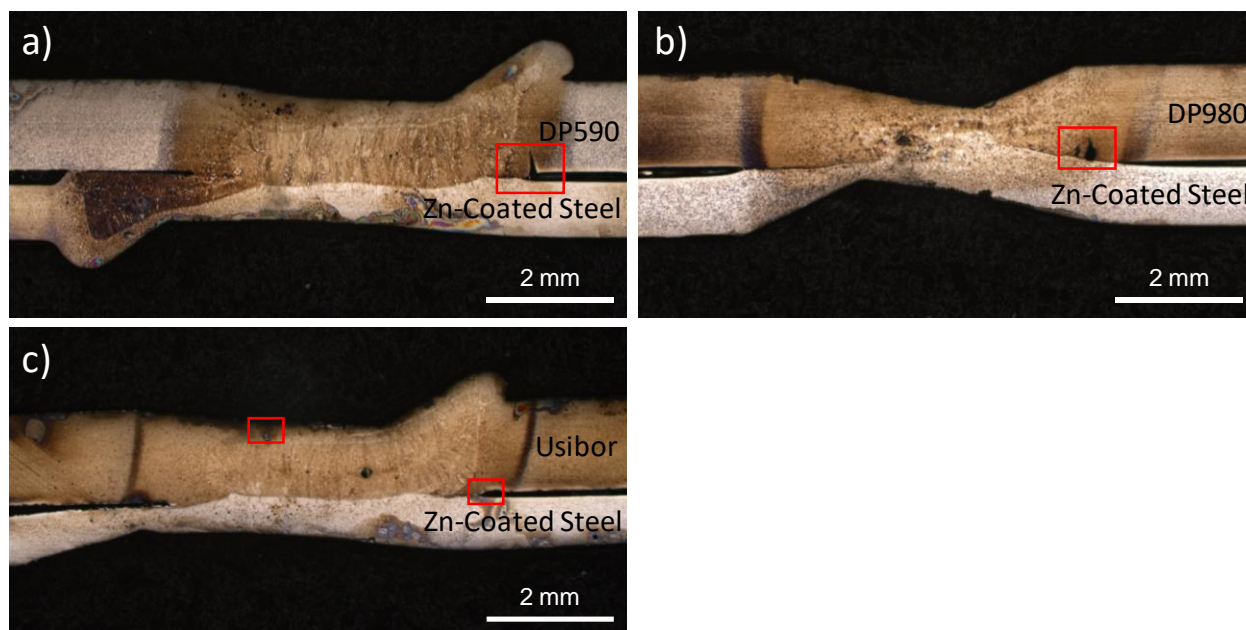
LOM micrographs (etched with 2% Nital) of weld cross-sections of weld set #5 samples: a) DP590, b) DP980, and c) Usibor-1500. Red rectangles mark the location of observed cracking in the weld cross-sections.
